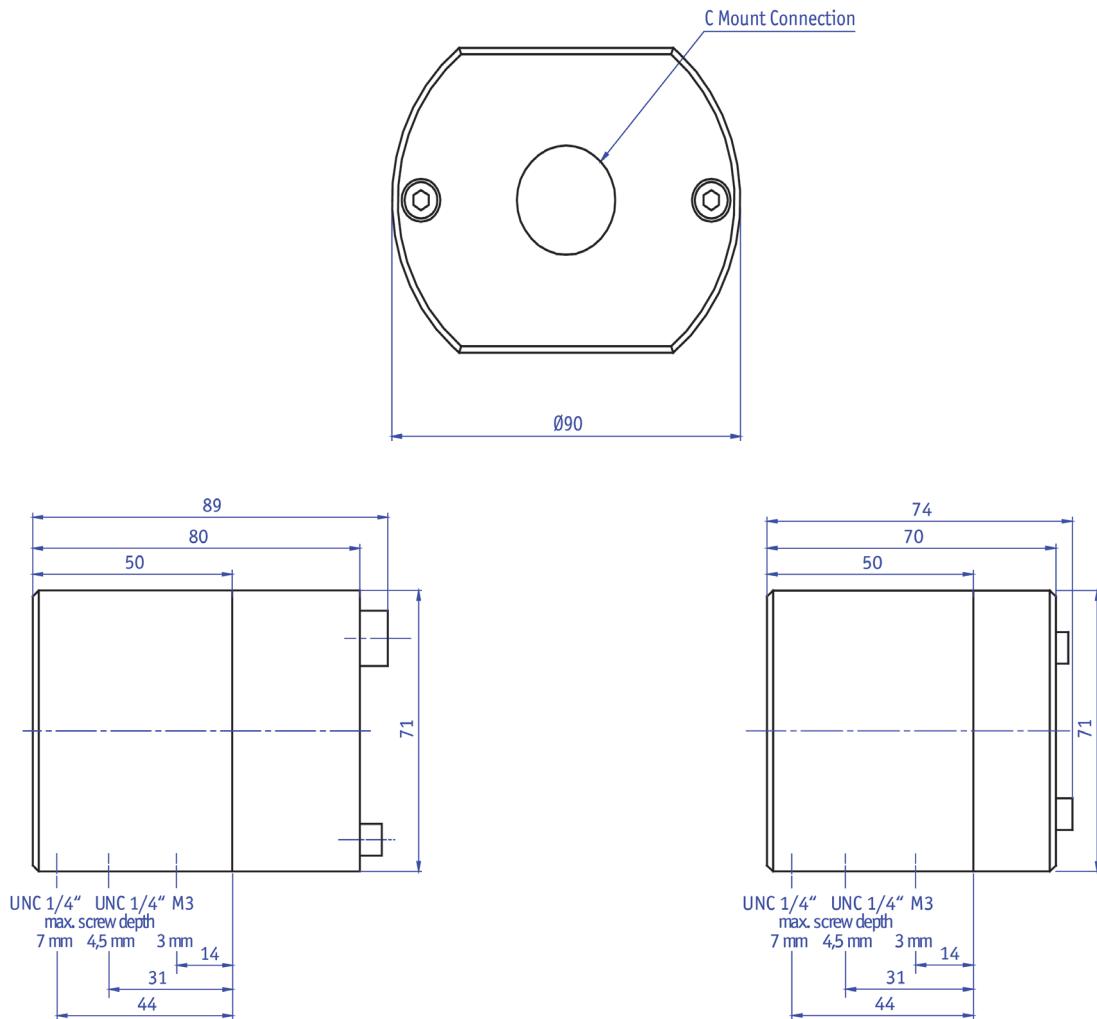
Camera dimensions: Goldeye P-008 SWIR
